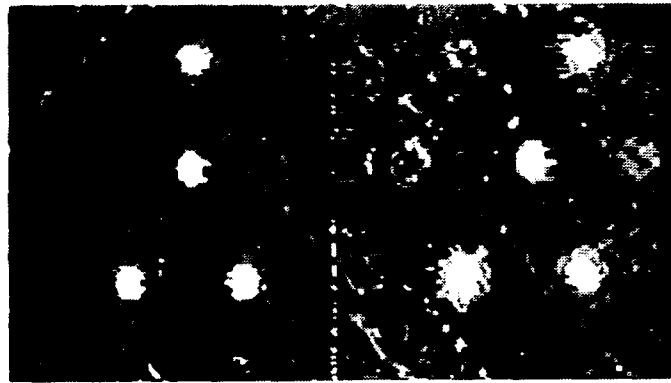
Flat Bottomed Hole Pattern in 0.95 In. Thick Carbon/Epoxy Laminate
